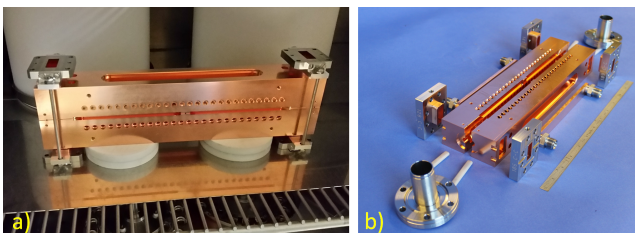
a) Structure clamped for pre-brazing microwave cold-test measurements. b) Structure parts before brazing. Tuning pins are not shown.
